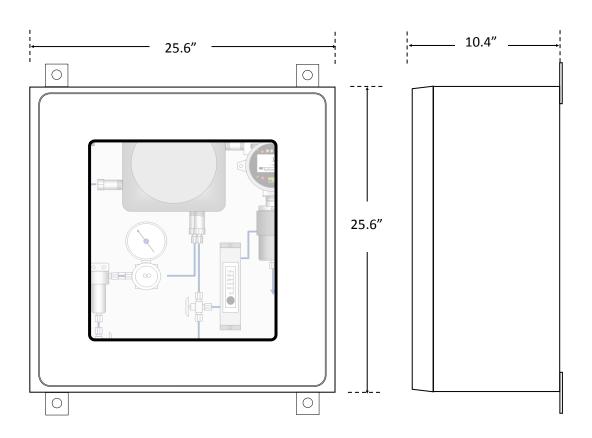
GDS-68SXP Dimensions With Wall-Mount Kit
